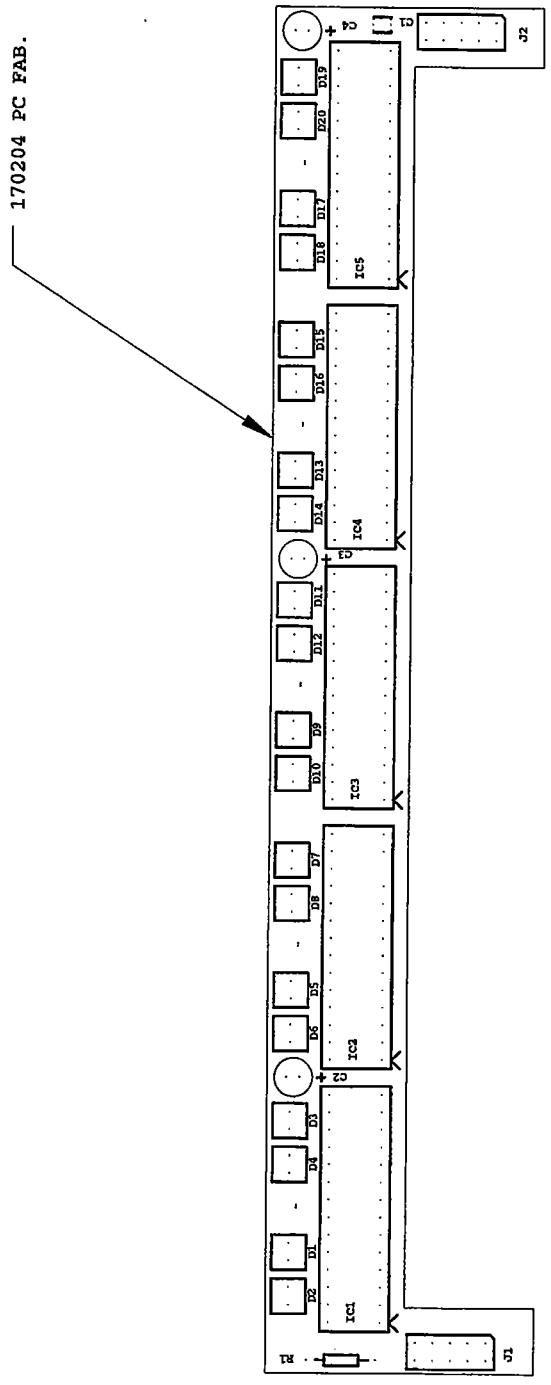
Assembly Drawing—ICS-92/92T Display PCB Rev. A
